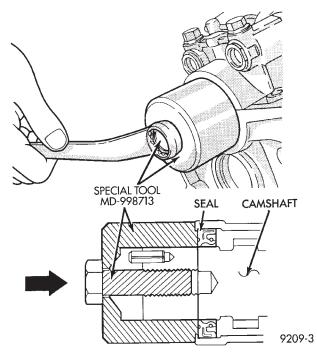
Camshaft Oil Seal Installation—Right Cylinder Head
